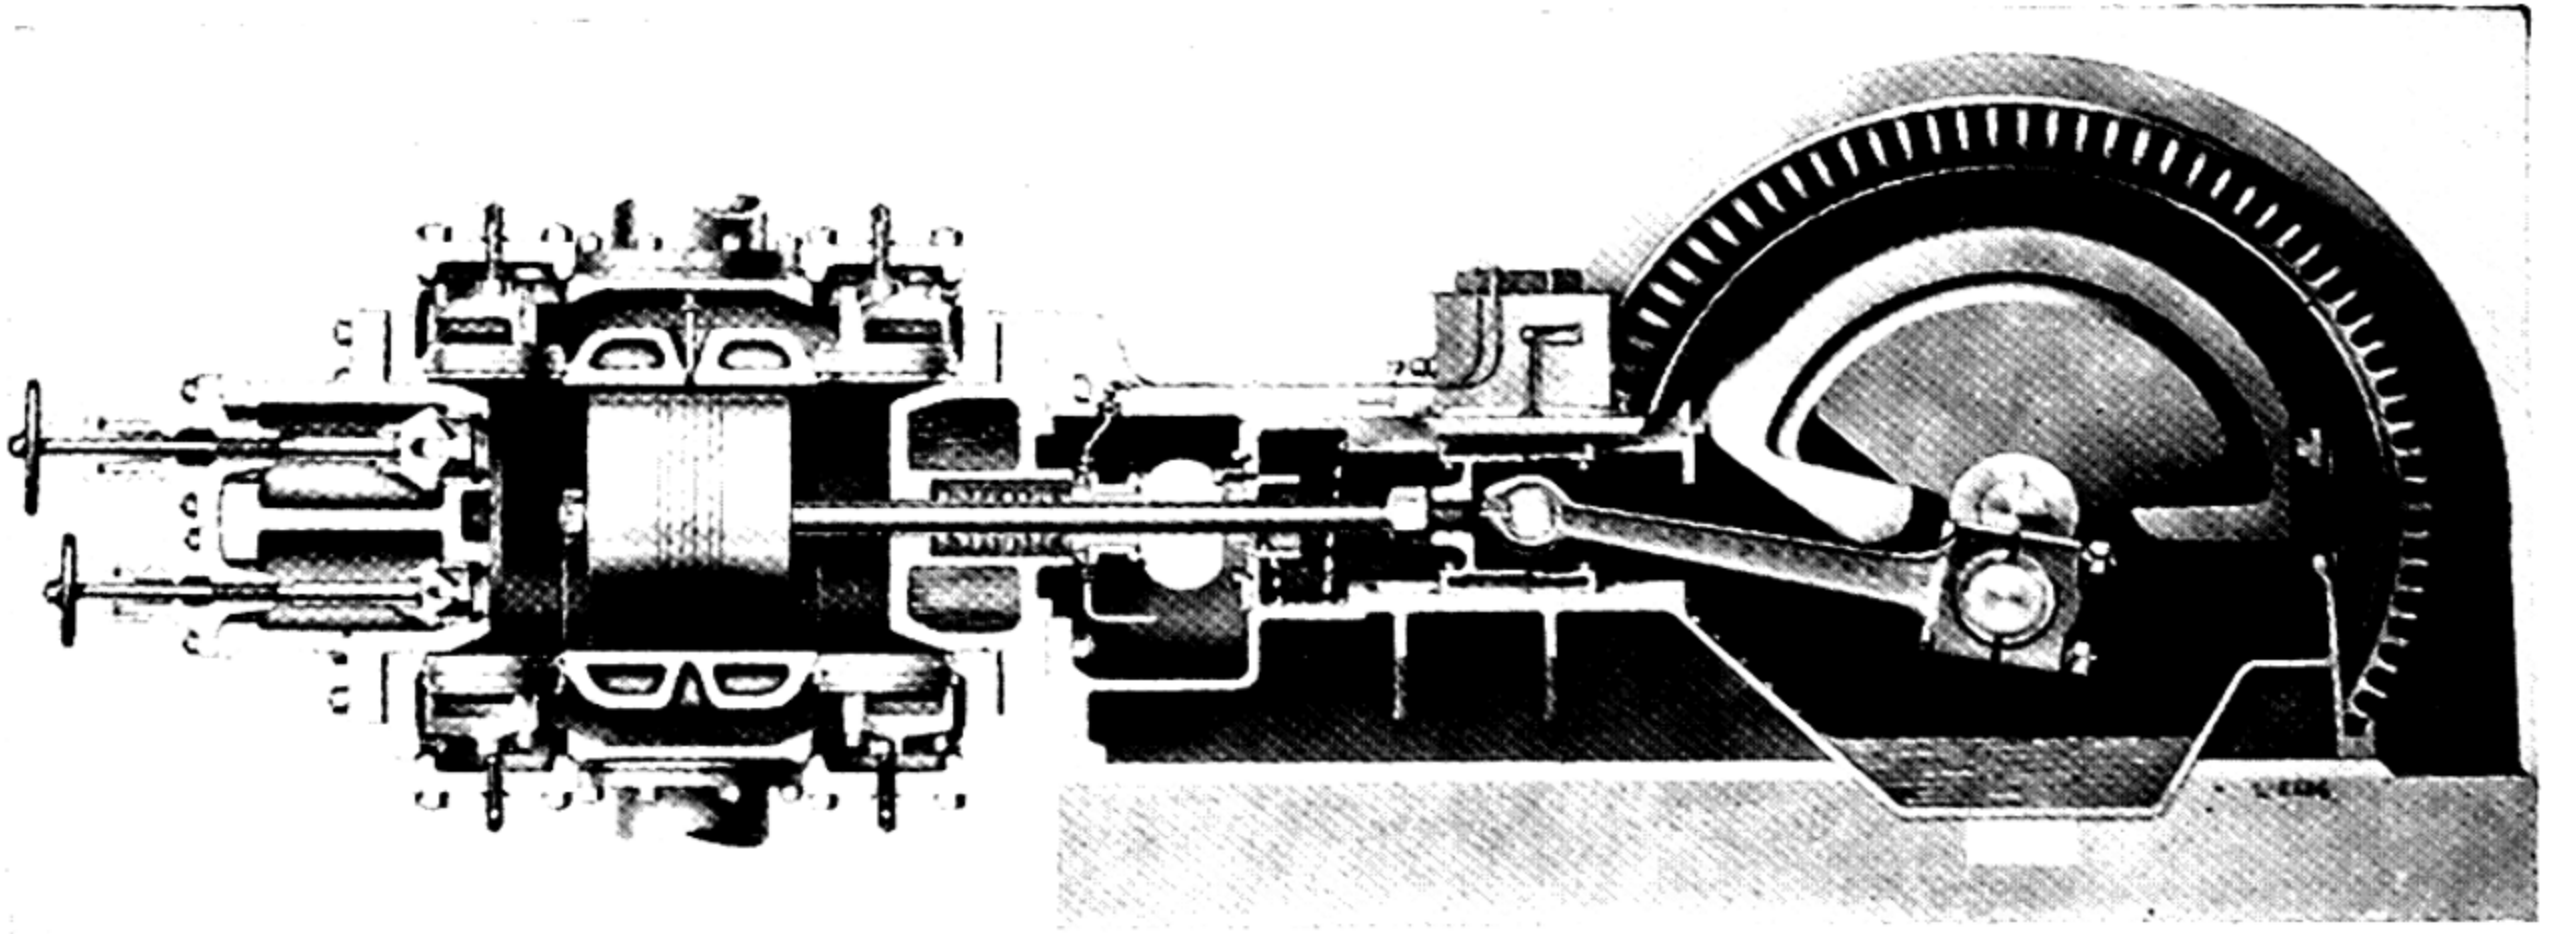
Horizontal double-acting compressor. Courtesy Worthington Pump and Machinery Corp.
